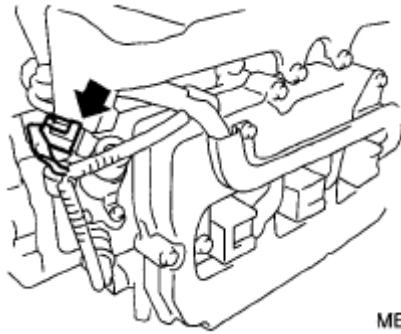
Identifying Connector And Oil Switching Solenoid Valve
